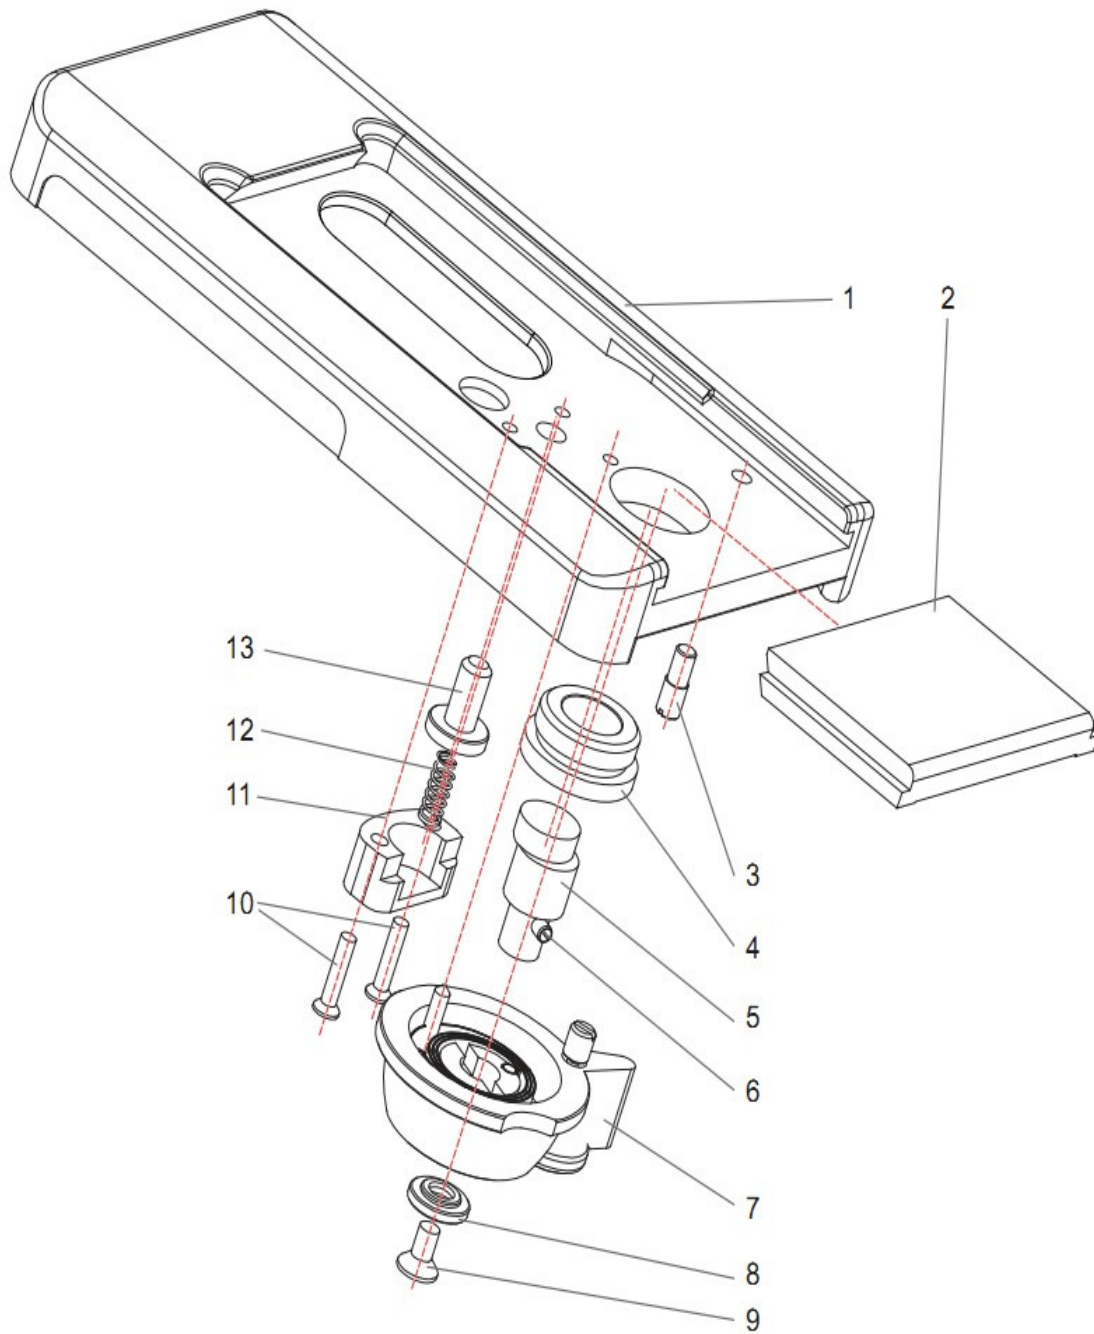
REACH PLUS 5 Fluid Head—Sliding Plate Unit Assembly
